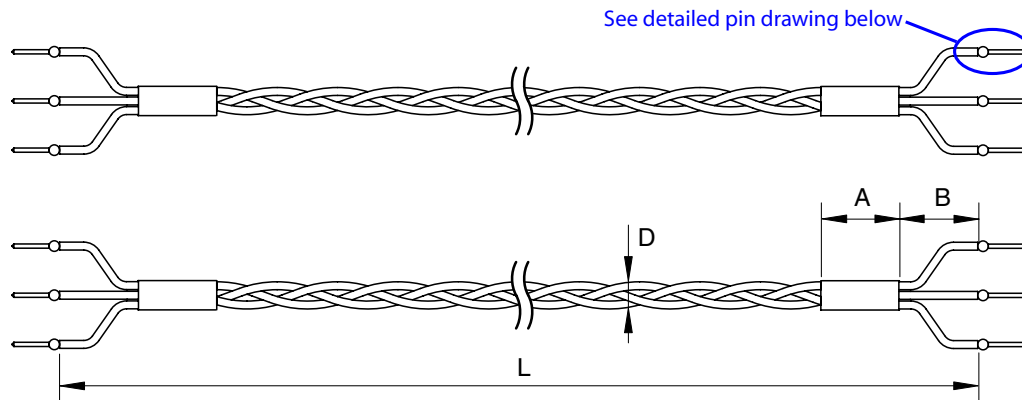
Outline drawing and dimensions for DC-DIYsig3x50 and DC-DIYsig3x100, 3-way DIY signal wire.
